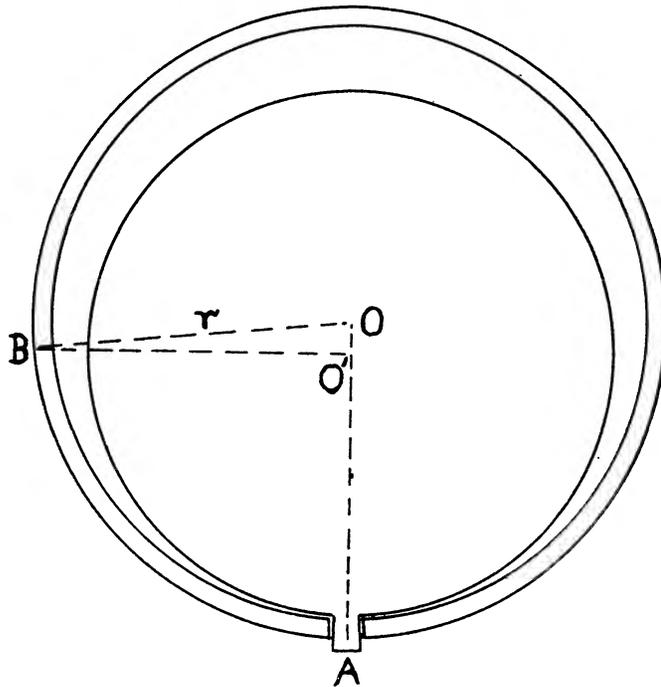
Effect of Eccentricity of Gear Spindle in Drum Shaft.
